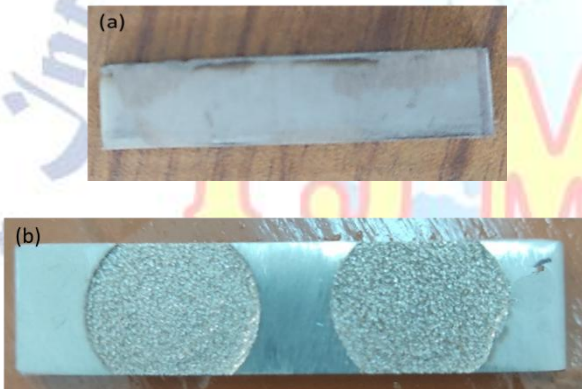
(A) Workpiece SS 316L plate and (B) EDM machined Workpiece
